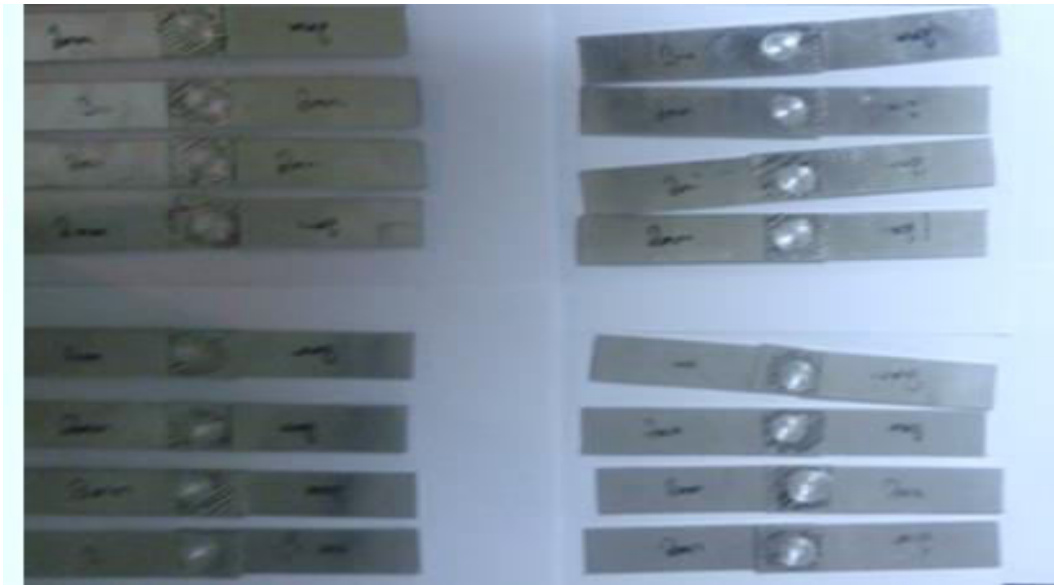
Physical appearances of friction stir spot welds samples.
